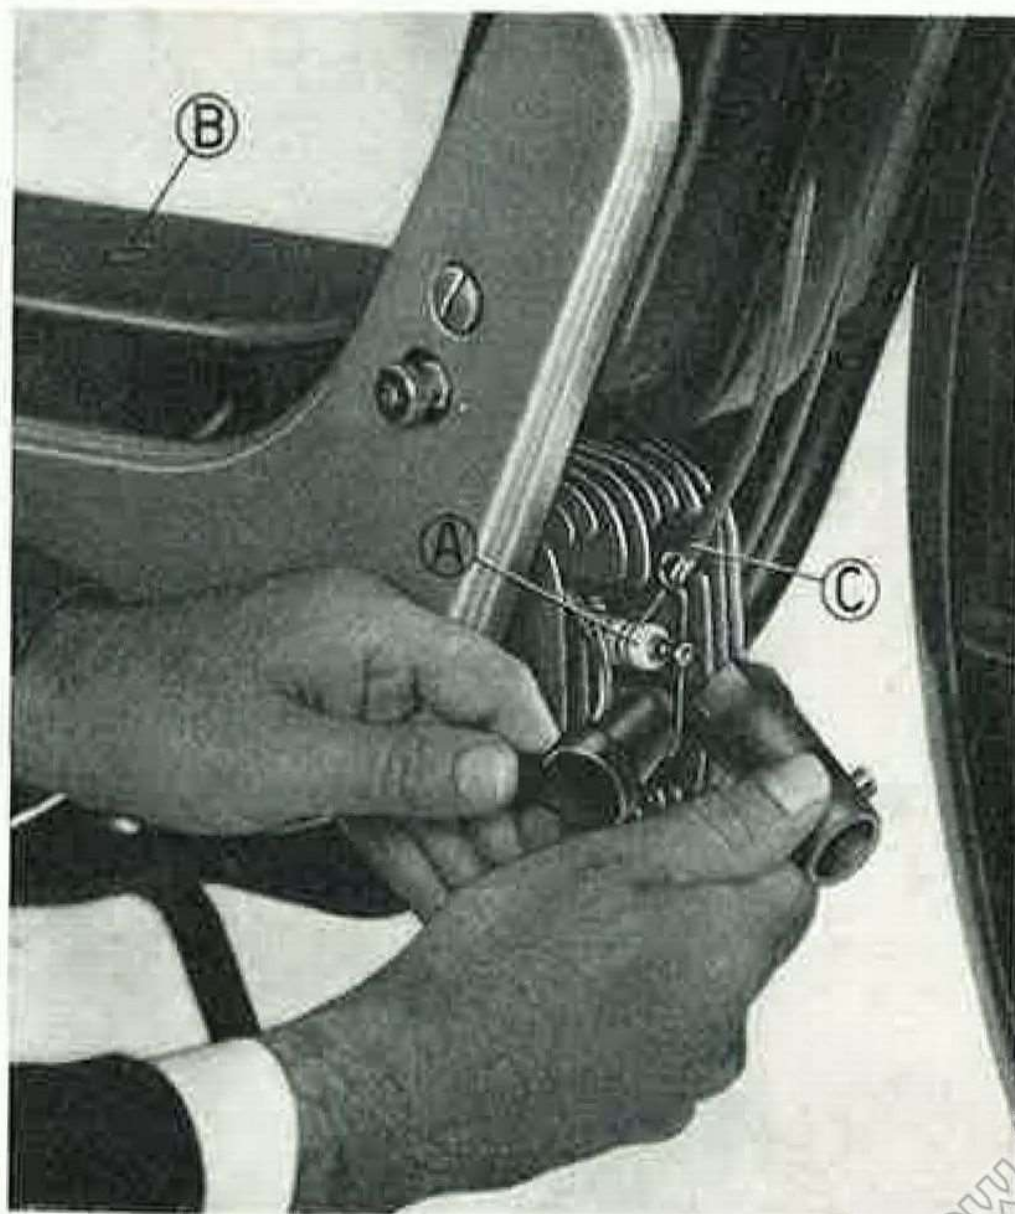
Dismantling spark plug cylinder head and engine cover.
